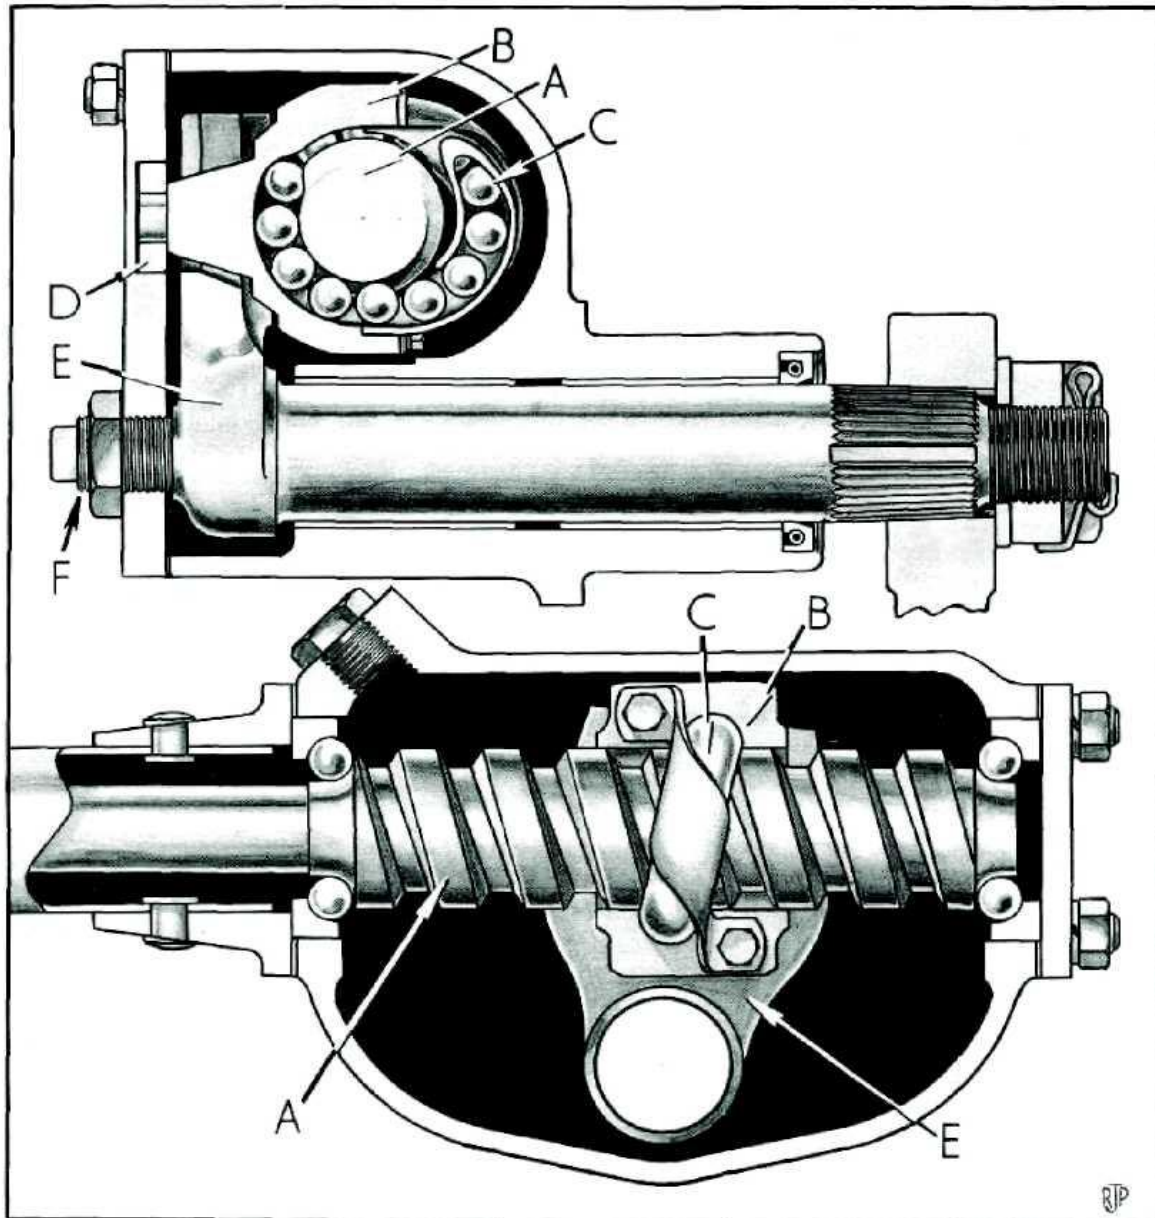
Sectional Diagrams of Model B Steering Box
